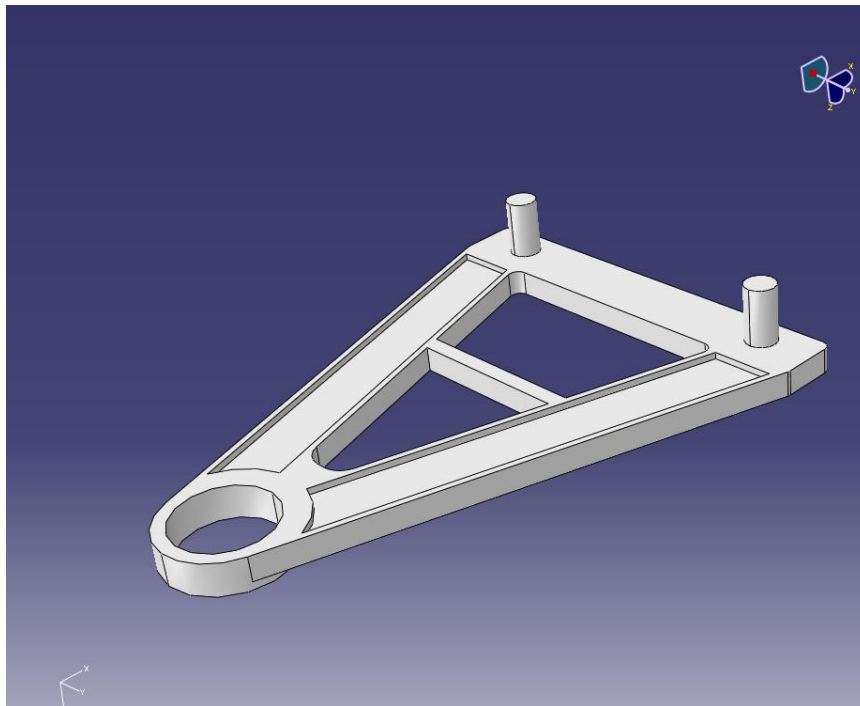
Illustration of the holder for the steering hydraulics.
